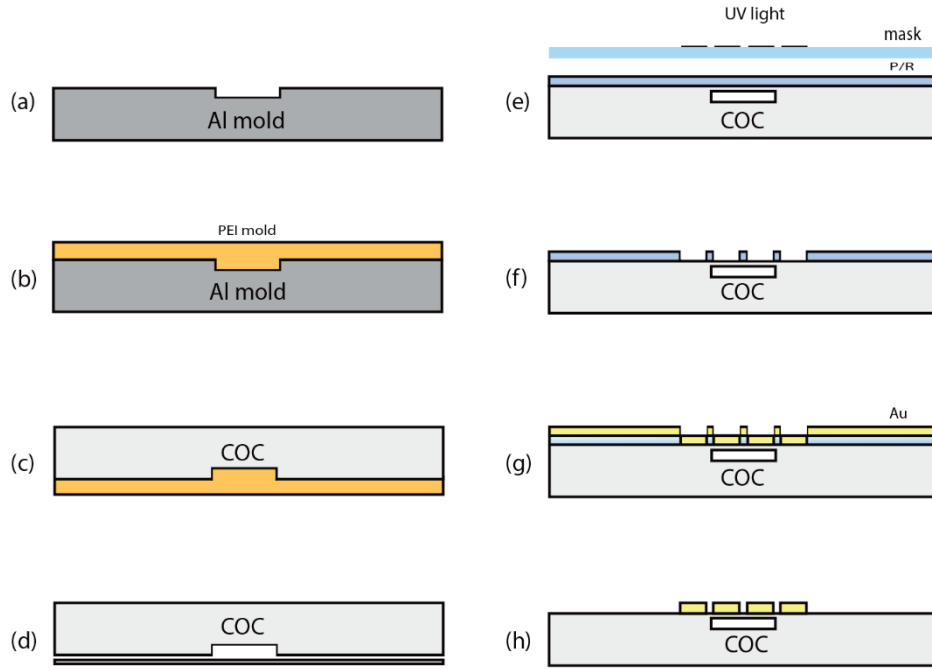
(a) CNC mills channels in Aluminum mold. (b) Polyetherimide (PEI) mold is embossed with Al mold. (c) COP resin is molded onto PEI mold. (d) COP wafer is exposed to decalin solvent and bonding to COP thin film. (e) Negative lift-off resist is spun onto COP wafer and photolithographically patterned. (f) COP wafer is developed (g) Cr and Au is deposited on top of COP wafer. (h) Final COP with Cr/Au elements
